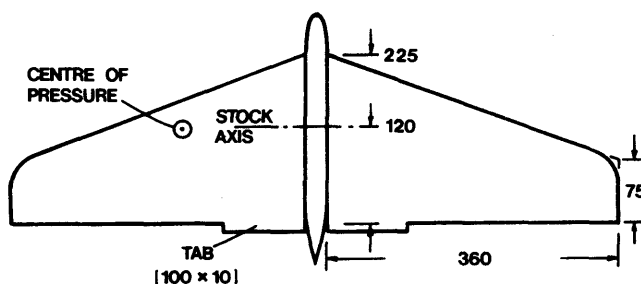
Final Design of Main Lifting Foils Dimensions in mm
